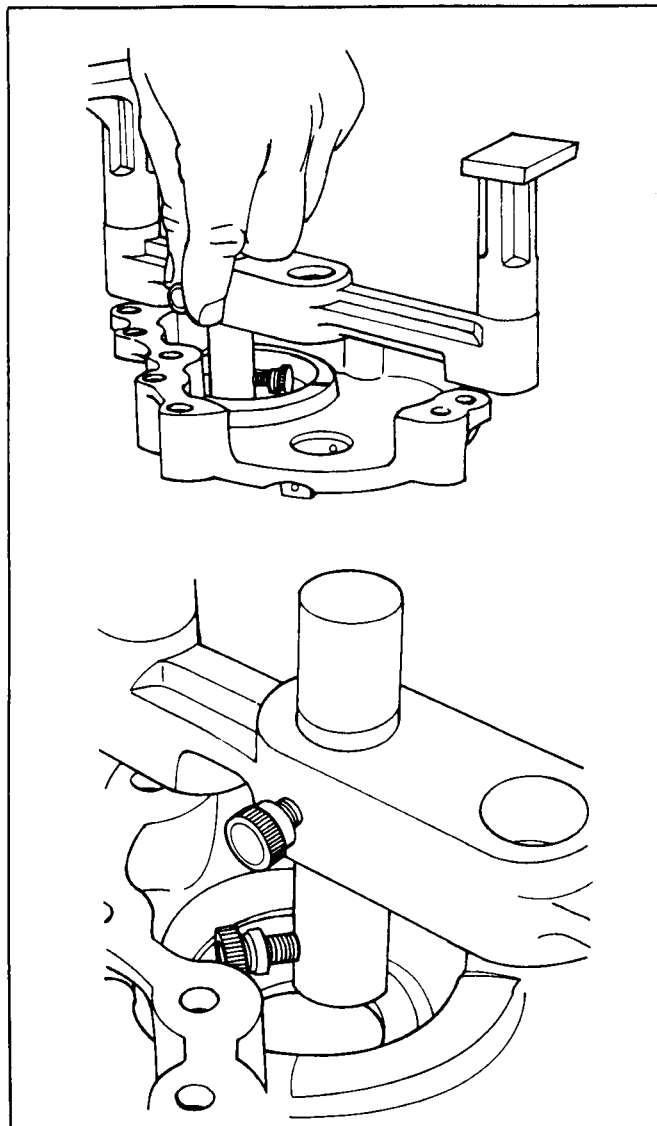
A-102 Measuring Bearing Seat/Brg. Housing
